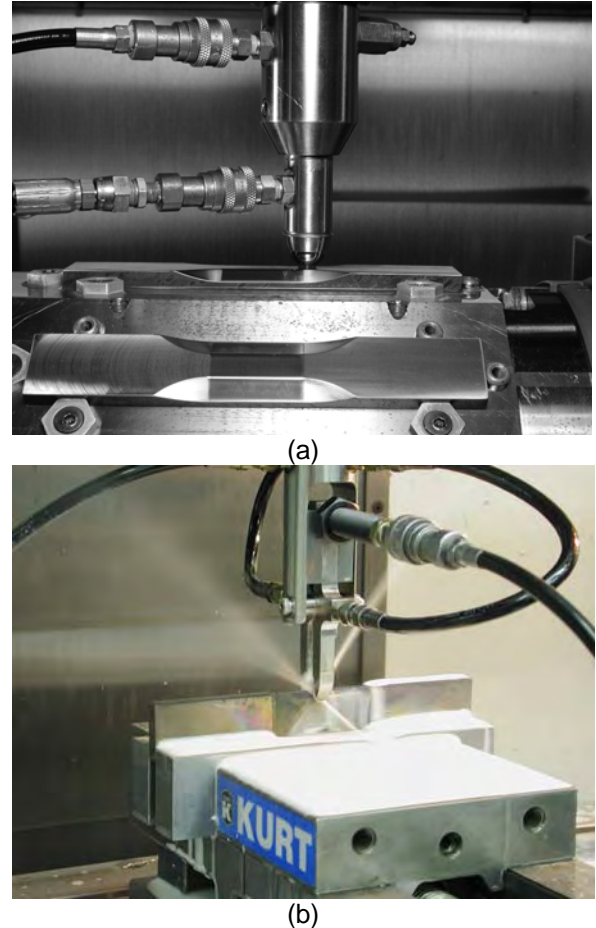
LPB processing in a 4-axis CNC mill – (a) thick section fatigue samples with a single point contact tool. (b) blade-edge fatigue sample with a caliper style tool.
